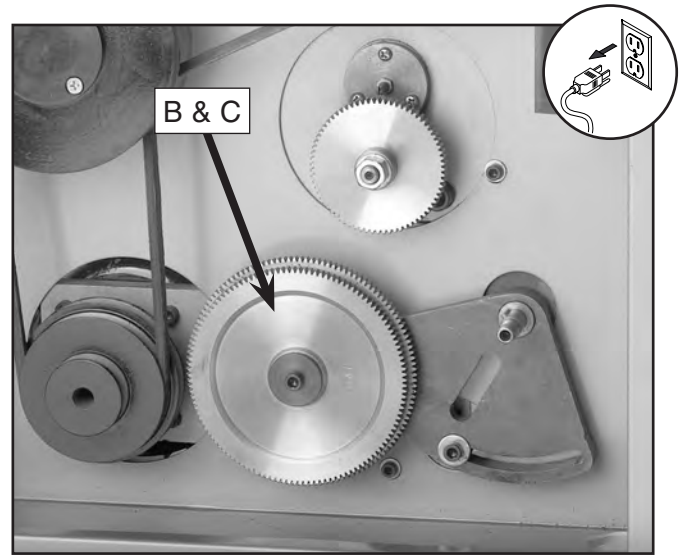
120/127 tooth combination gear installed at gear position B & C.
